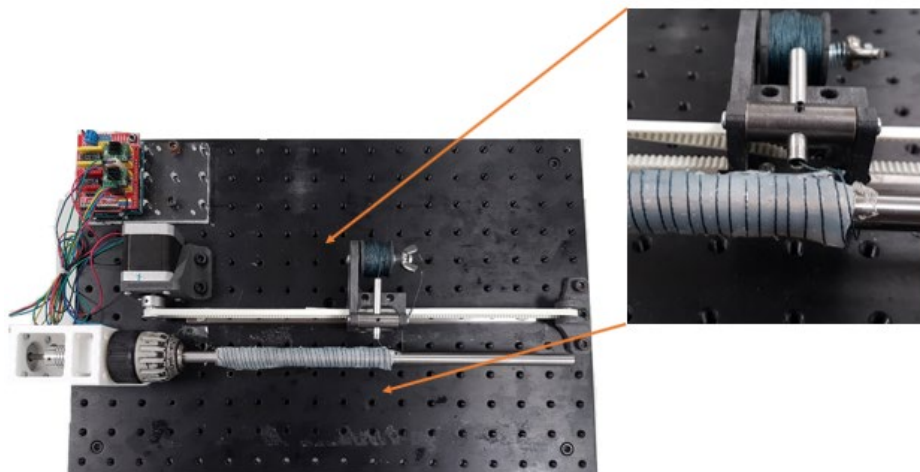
Automatic fibre winding machine with an exploded view of the spool supply.
